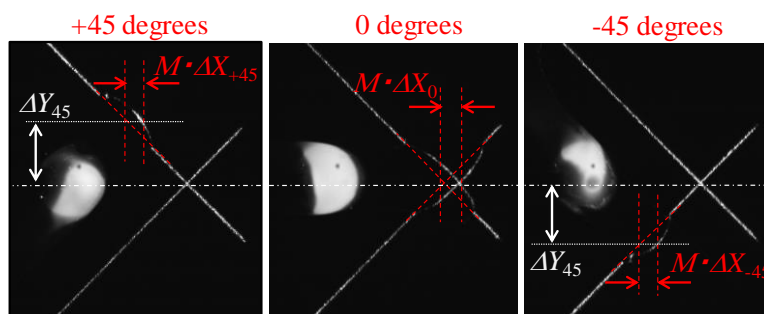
Images of crossed line beams on a weld bead during laser thermal processing at 0-degree and ±45-degree direction.
